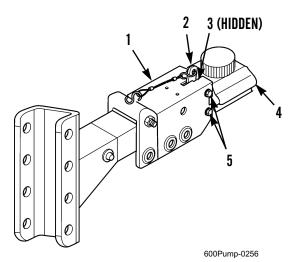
Breakaway Lever and Leaf Spring - Installed.
